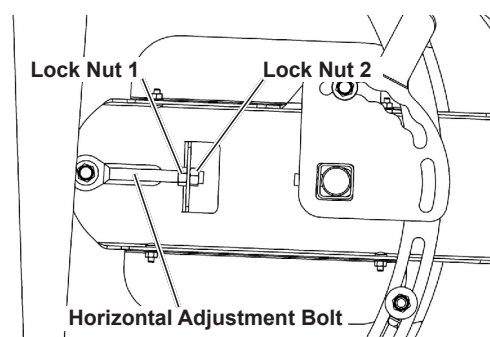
Feed Auger Drum Fore/Aft Adjustment
